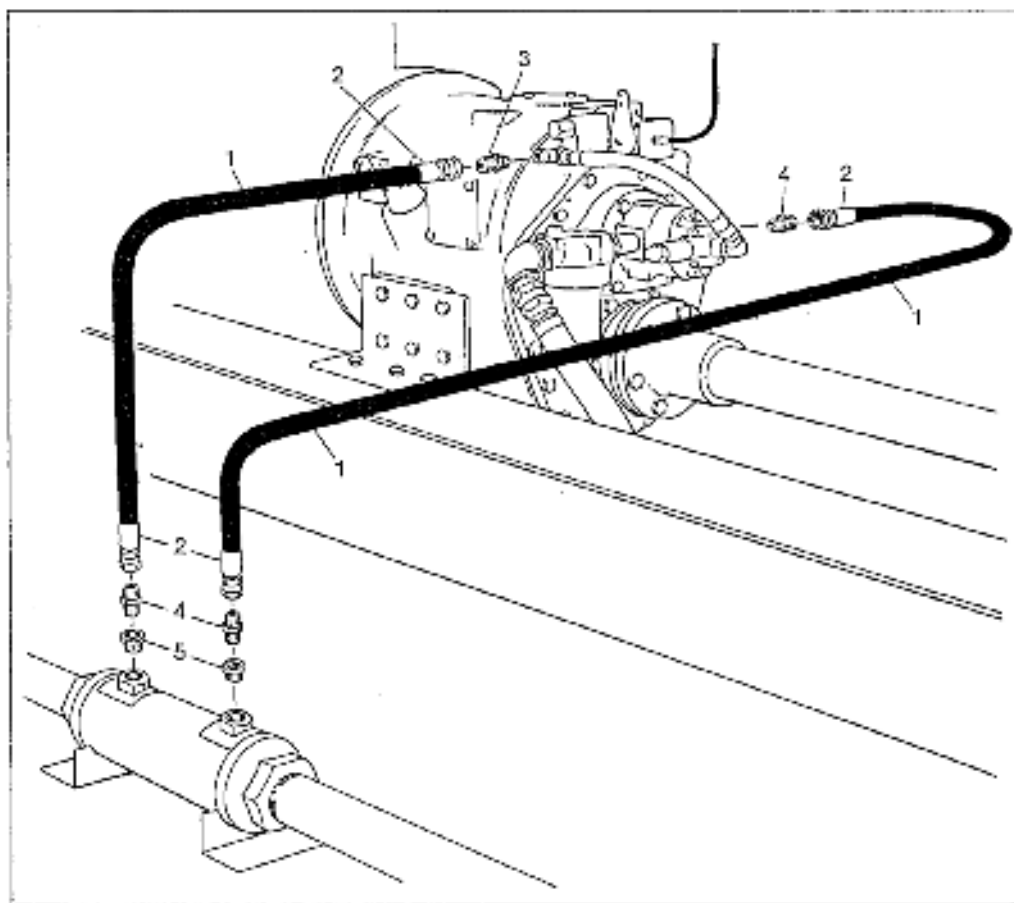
Hose and Fitting Kit no. 1-13949-0000.
